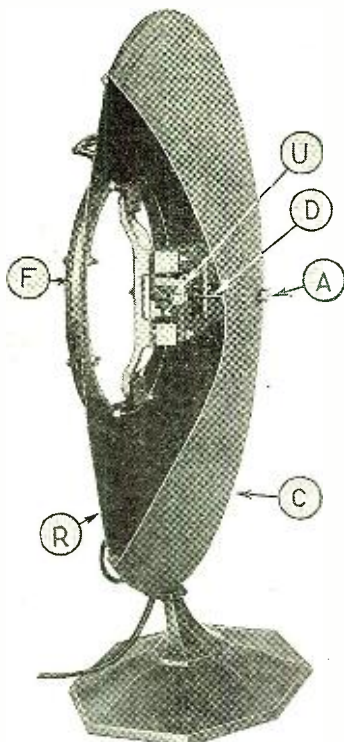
Fig. C. Cut-away view of double fixed-edge cone; showing mechanical construction: A, apex; C, front cone; R, rear cone; F, metal frame; U, speaker unit; D, driving rod.
